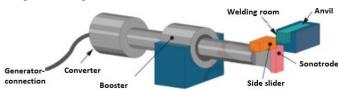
Ultrasonic welding machine designed to make splices between at least two wires.
